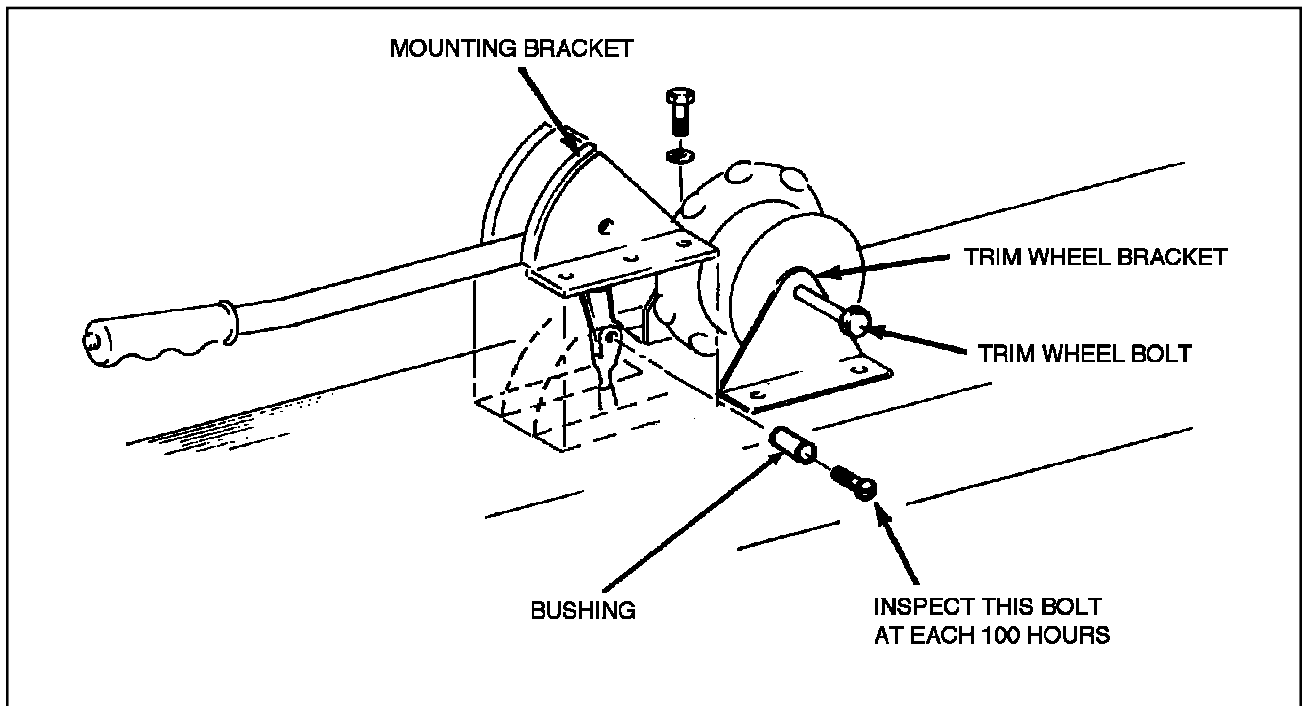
Flap Control Cable Attachment Bolt Inspection (Typical)
